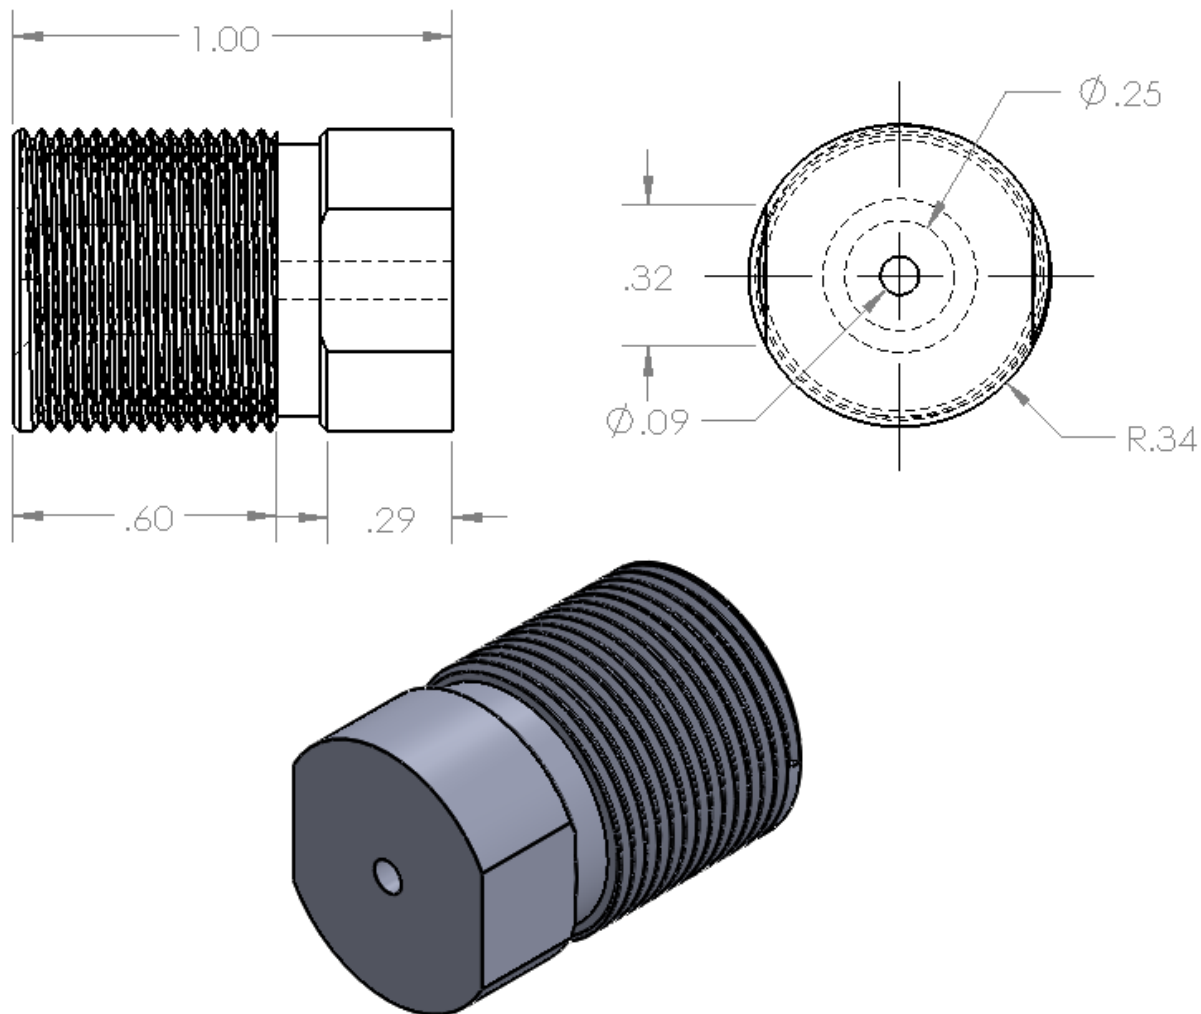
Solidworks drawing of pyrotechnic valve squib cap.
